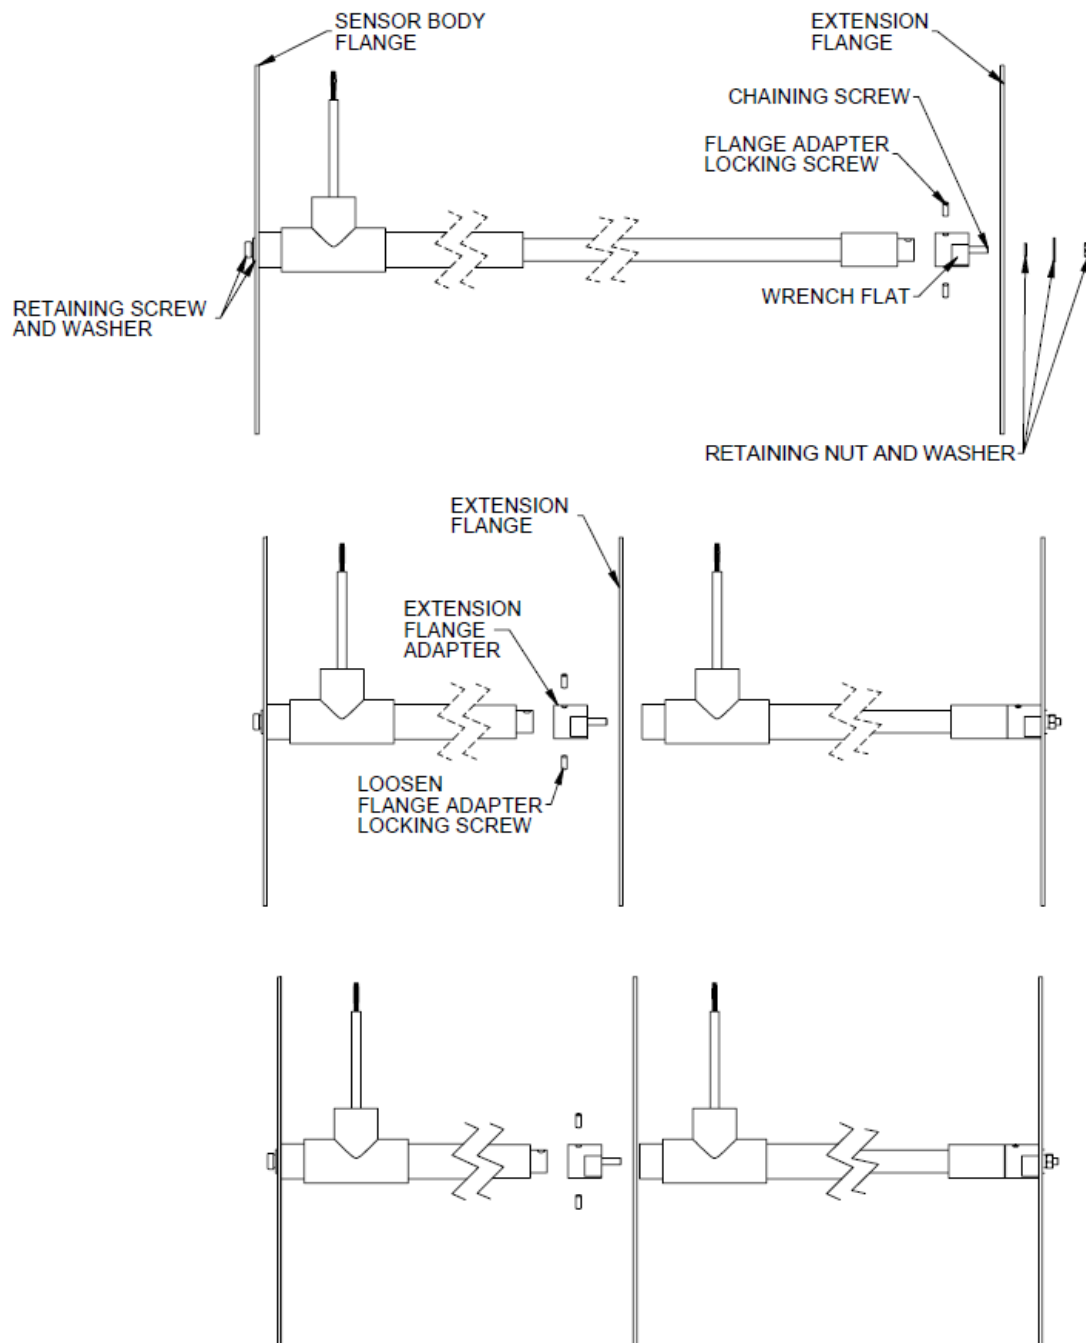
INSTRUMENT PLACEMENT DETAILS
